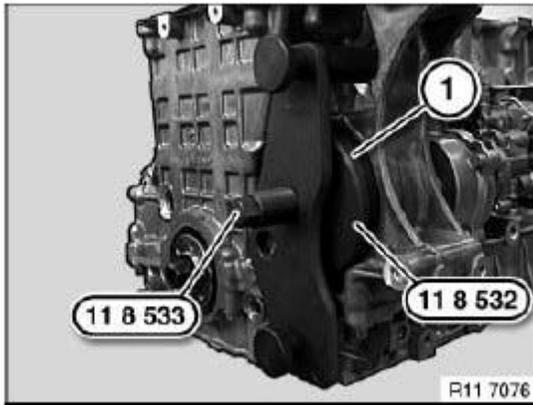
Identifying Sealing Cover With Special Tools (11 8 532) And (11 8 533)
